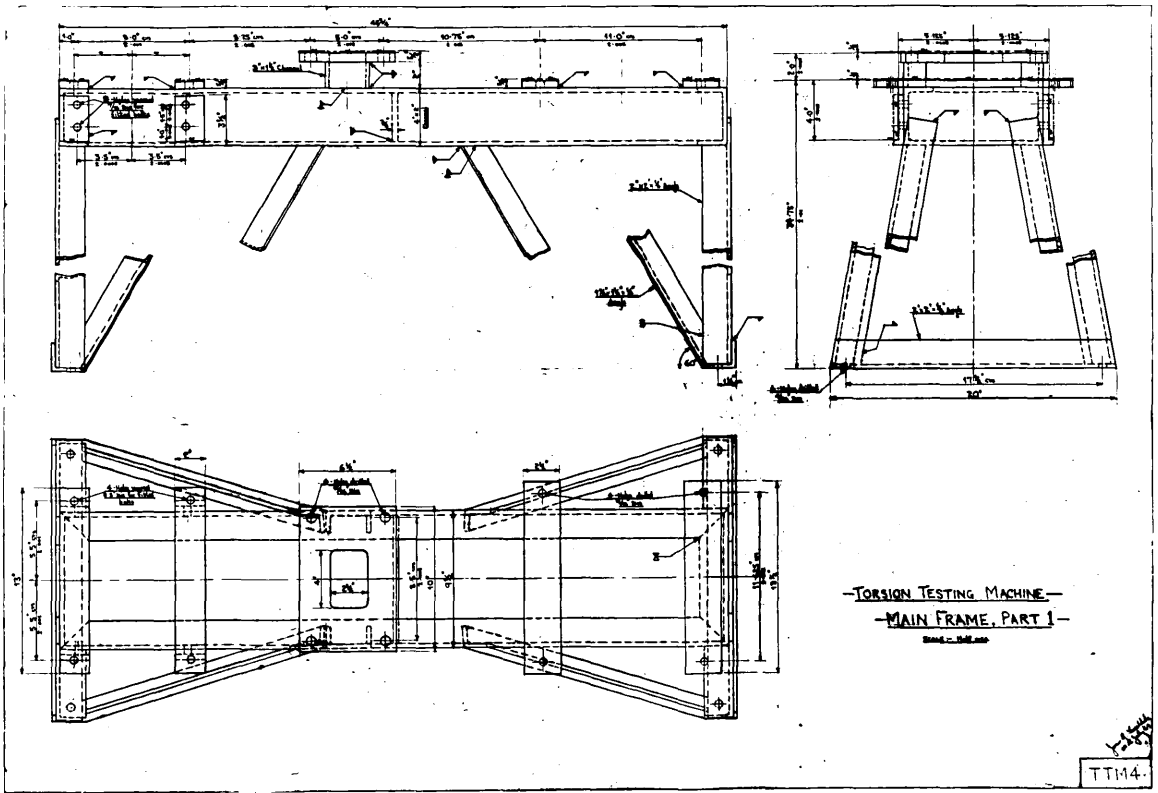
13 photographically reproduced to  $\frac{1}{5}$ th size.
